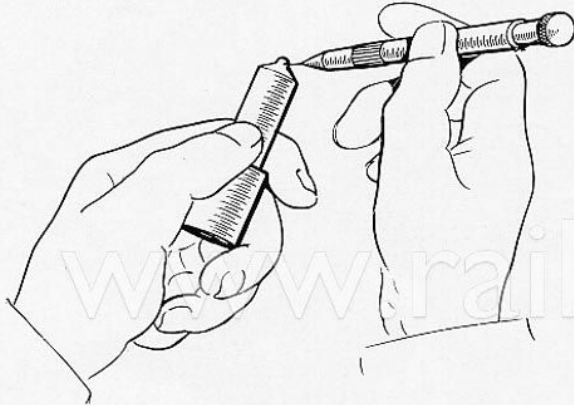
CLEANING NOZZLE SPRAY HOLES
